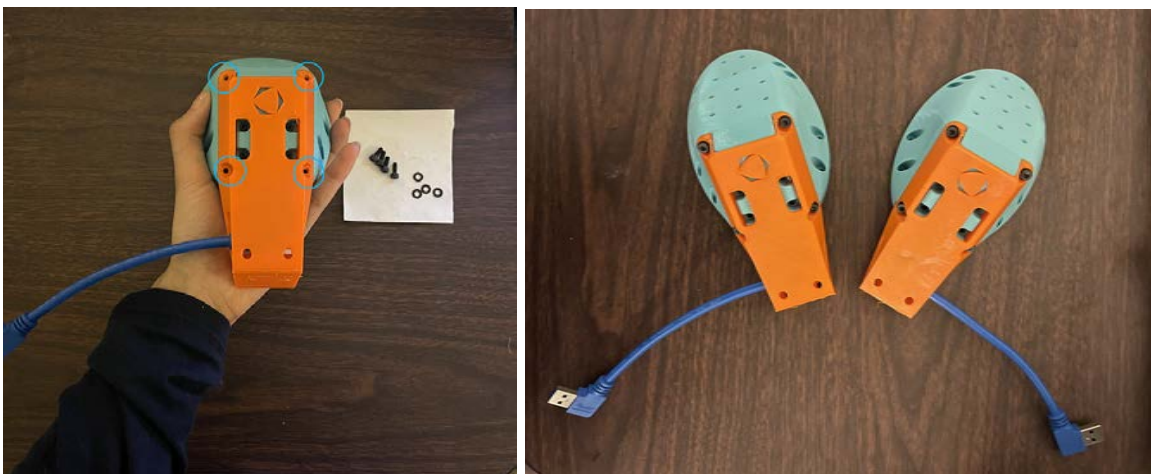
Mounting of part Gripper\_Finger\_Mount on to part Bubble\_Gripper\_Body
